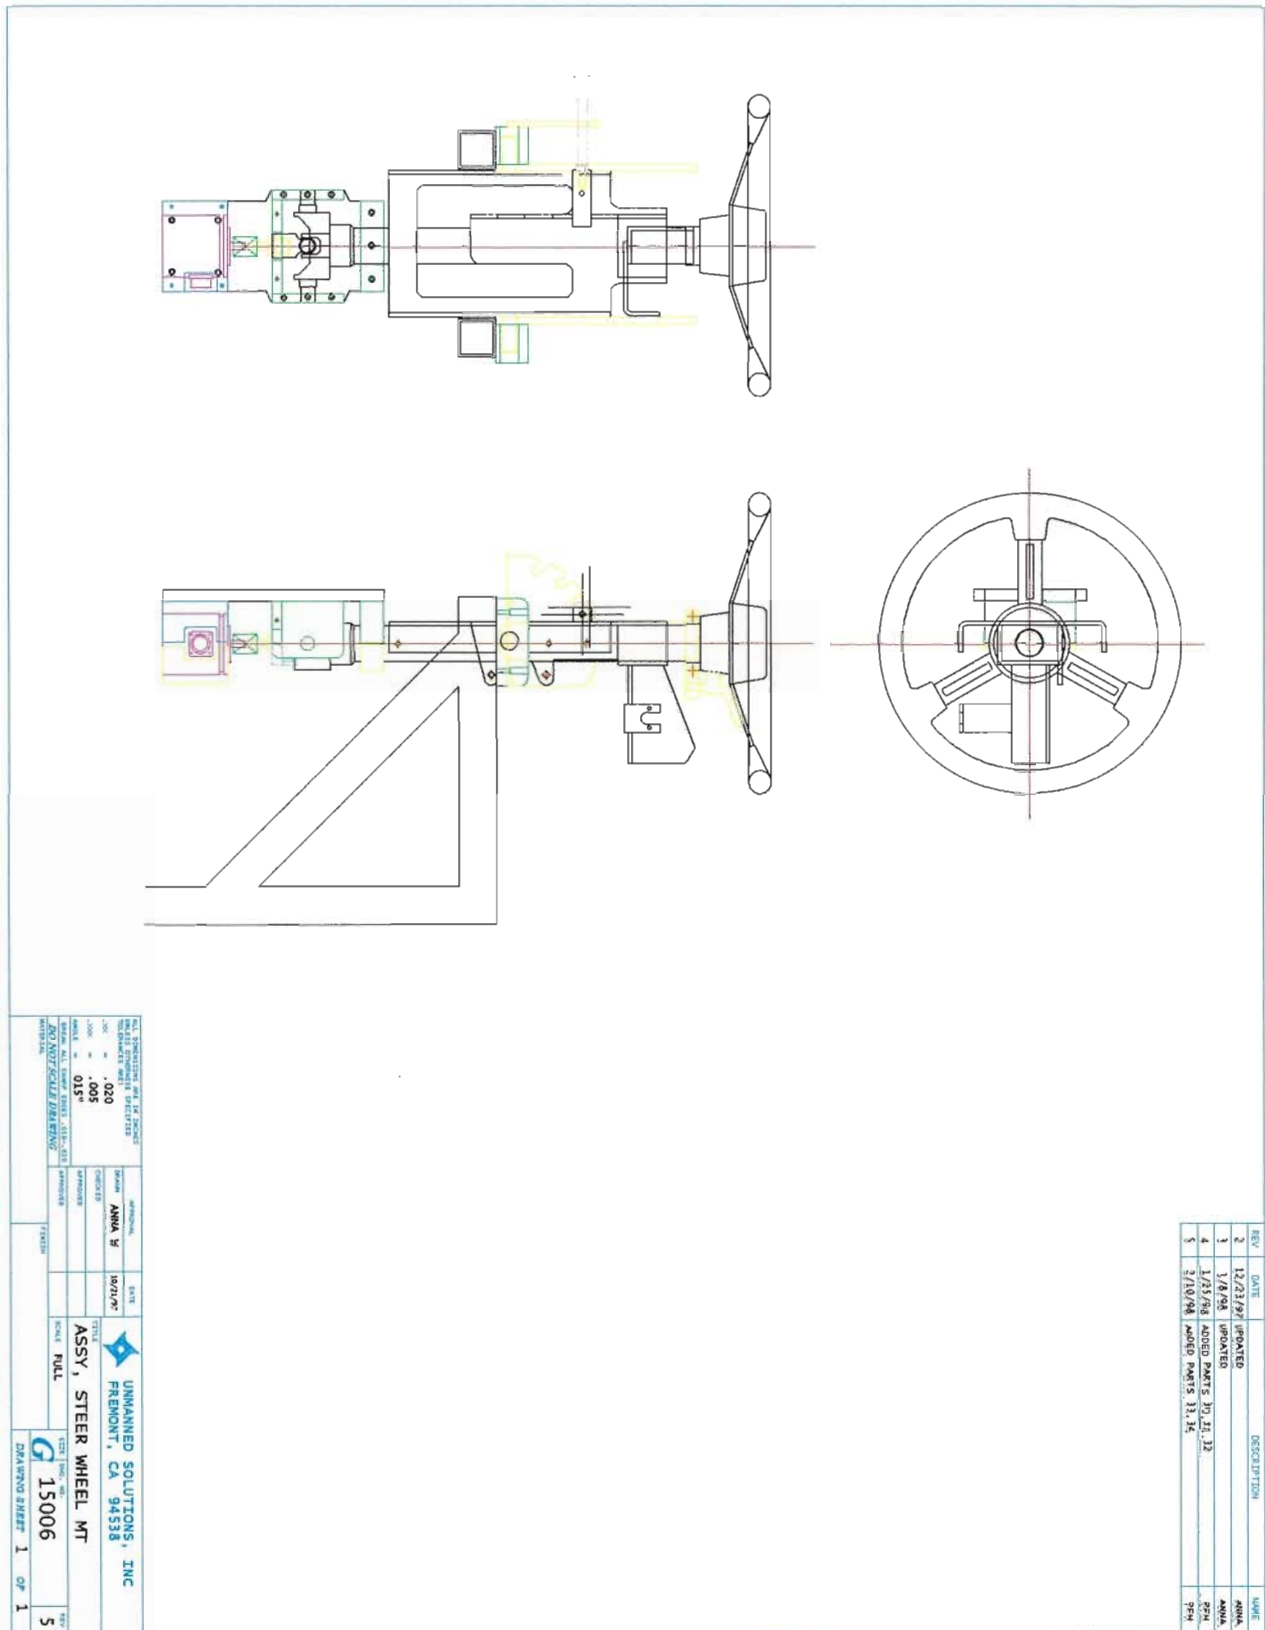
STEERING ASSEMBLY FOR THE SROU UNIT
